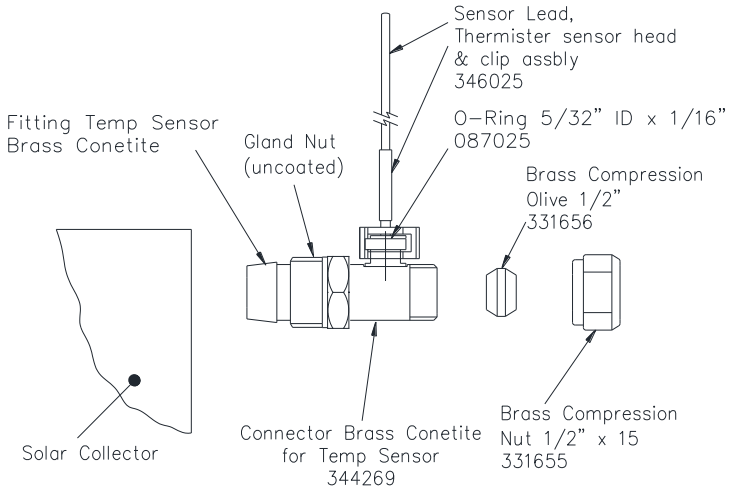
DETAIL A – COLLECTOR UNION ASSEMBLY – CONETITE FITTING
